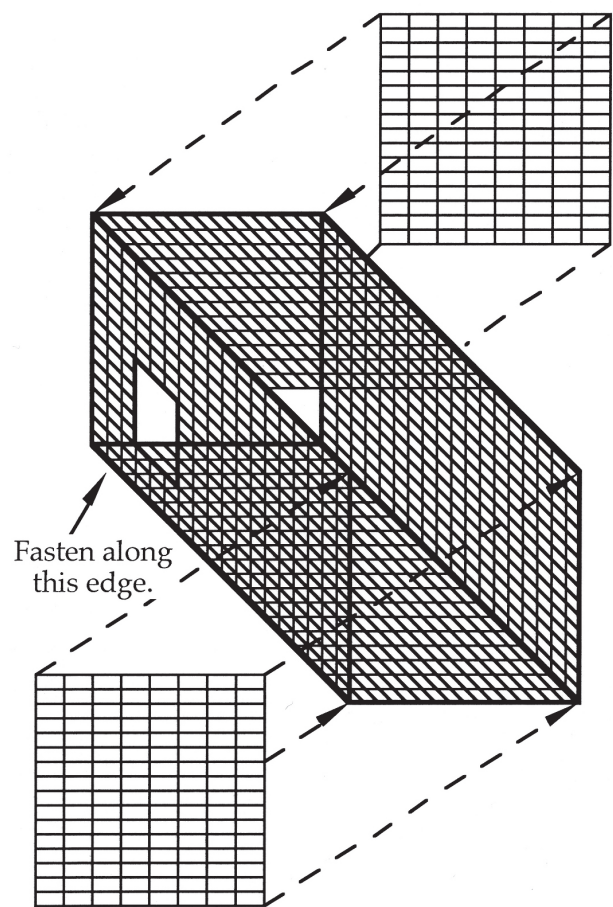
Plan A-Placement for attaching end pieces to main body of cage.
